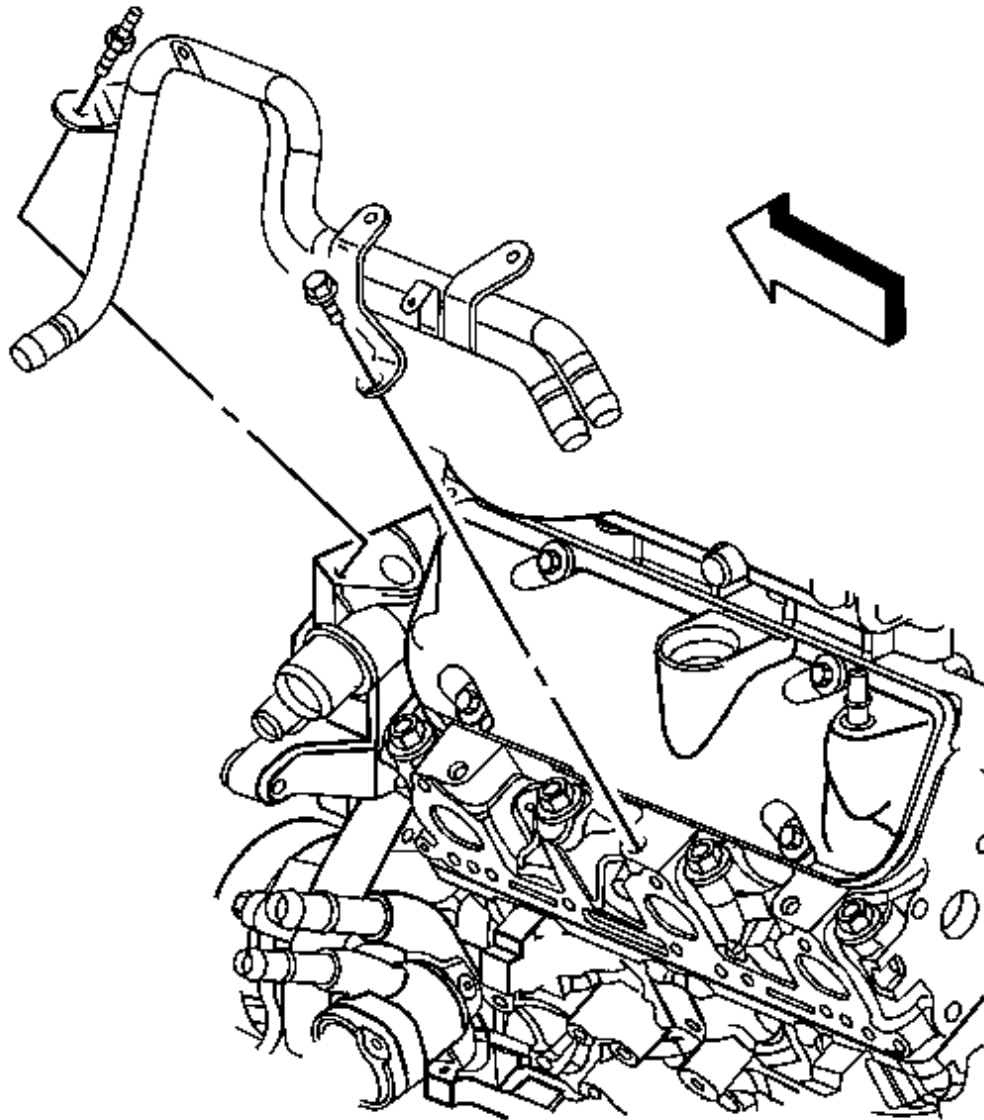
Locating Heater Inlet & Outlet Pipe To Vehicle
